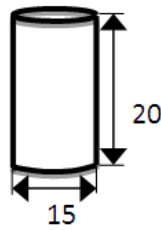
Hardness Test Specimen (All dimensions in mm)
